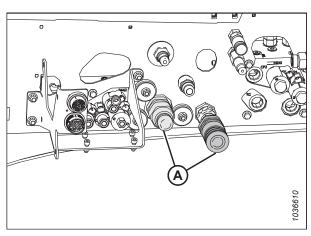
Header Hydraulics Configuration – Rotary Disc-Ready with Quick Couplers
